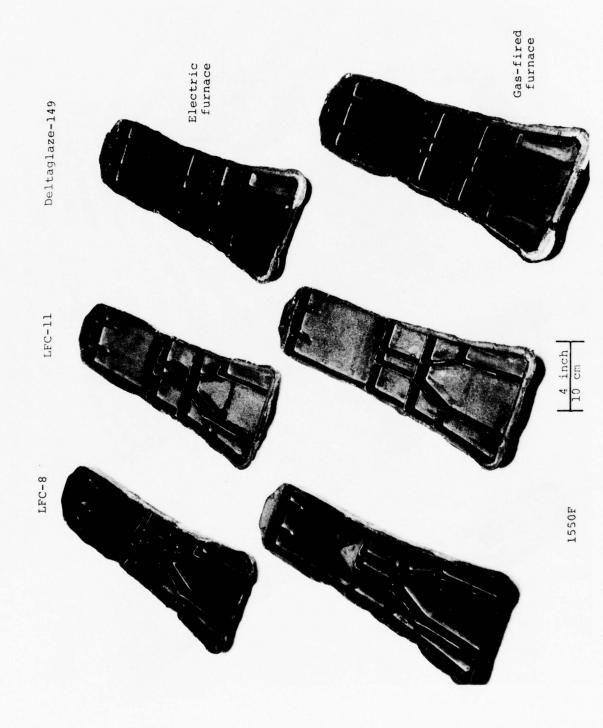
Closeup view of structural component forgings produced by isothermal forging at 1550F using three different lubricants
